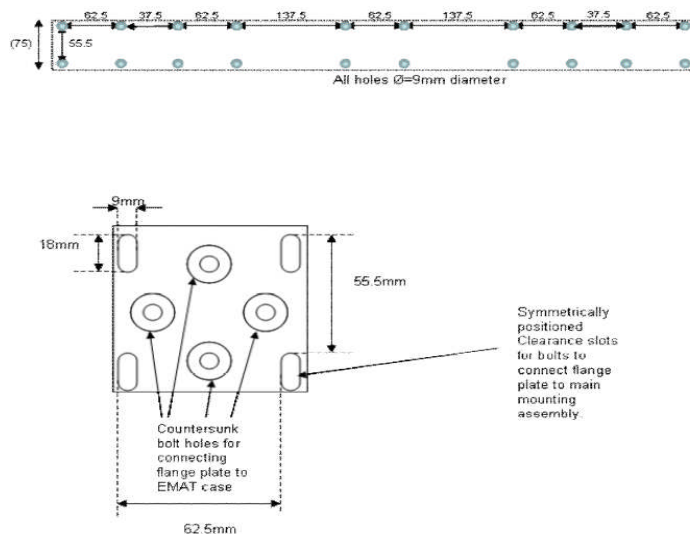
Schematic of flange plate and mounting plate which connects EMATs to deployment mechanism.
